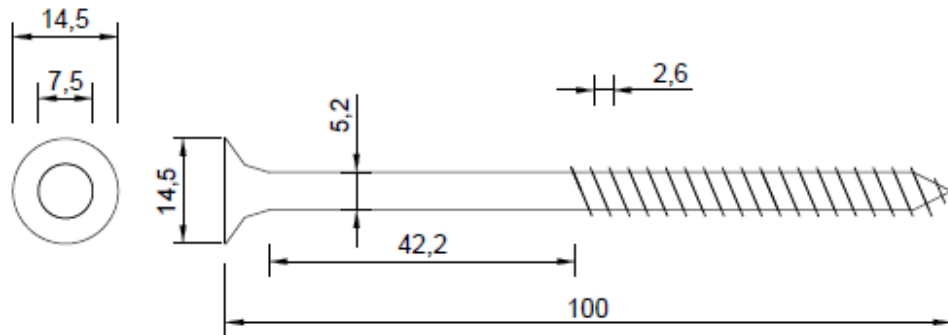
Dimensions of type 17 the normal screws (mm)
